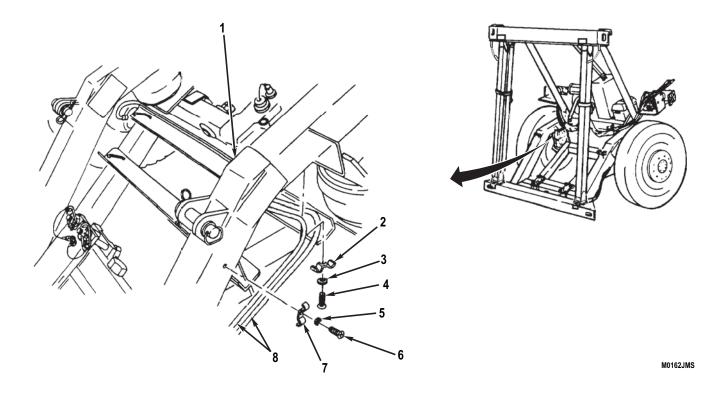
Hydraulic Control Valve-to-Hydraulic Positioning Cylinder Hose Assemblies Removal.
